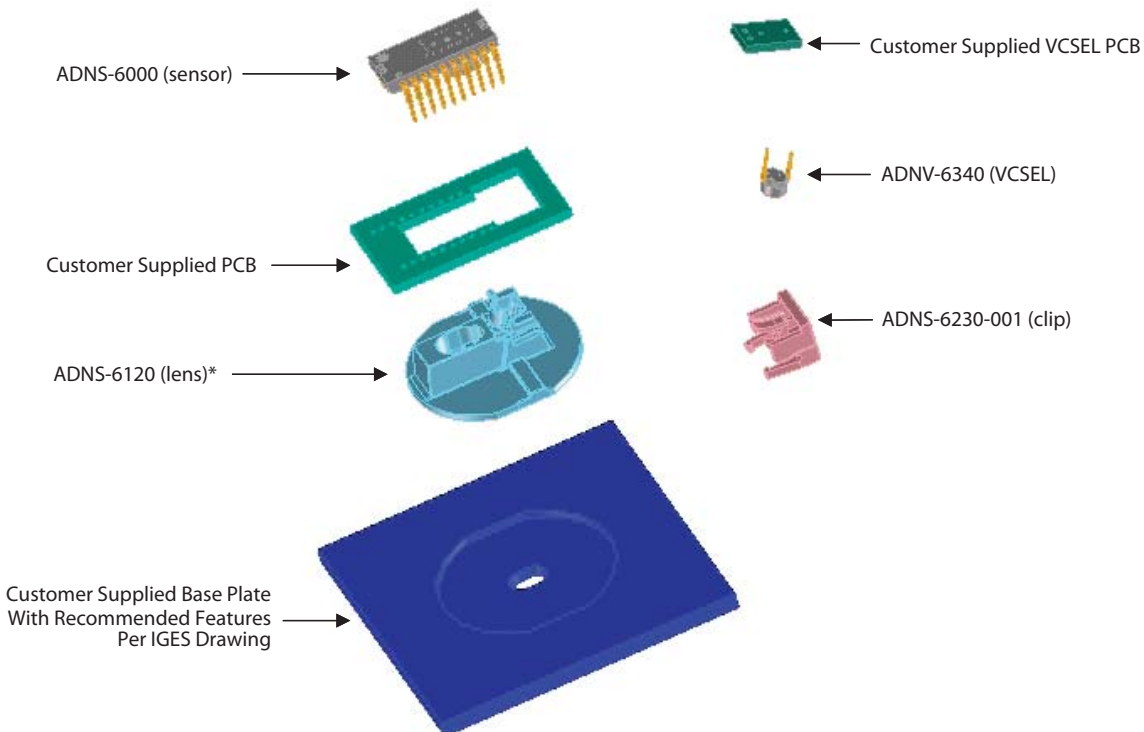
Exploded view drawing of optical tracking engine with ADNS-6000 Optical Mouse Sensor
